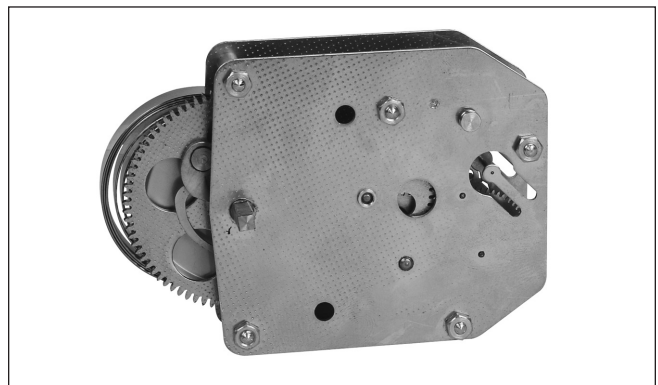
Clock with spring wound. Clock ready to be mounted in feeder.
